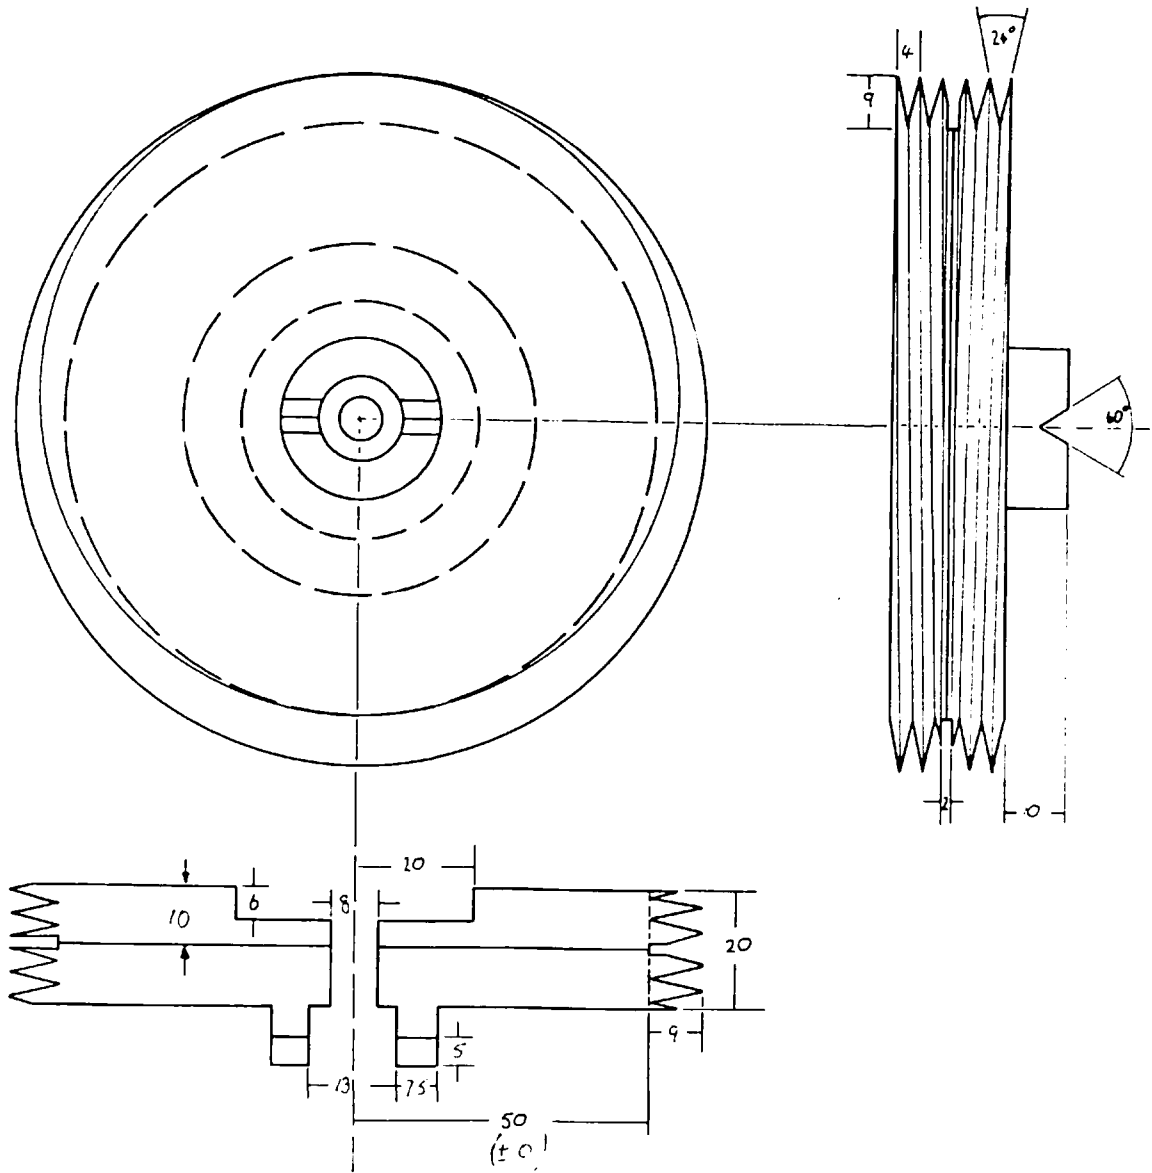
Design drawing of grooved take-up wheel. Dimensions in (mm)
